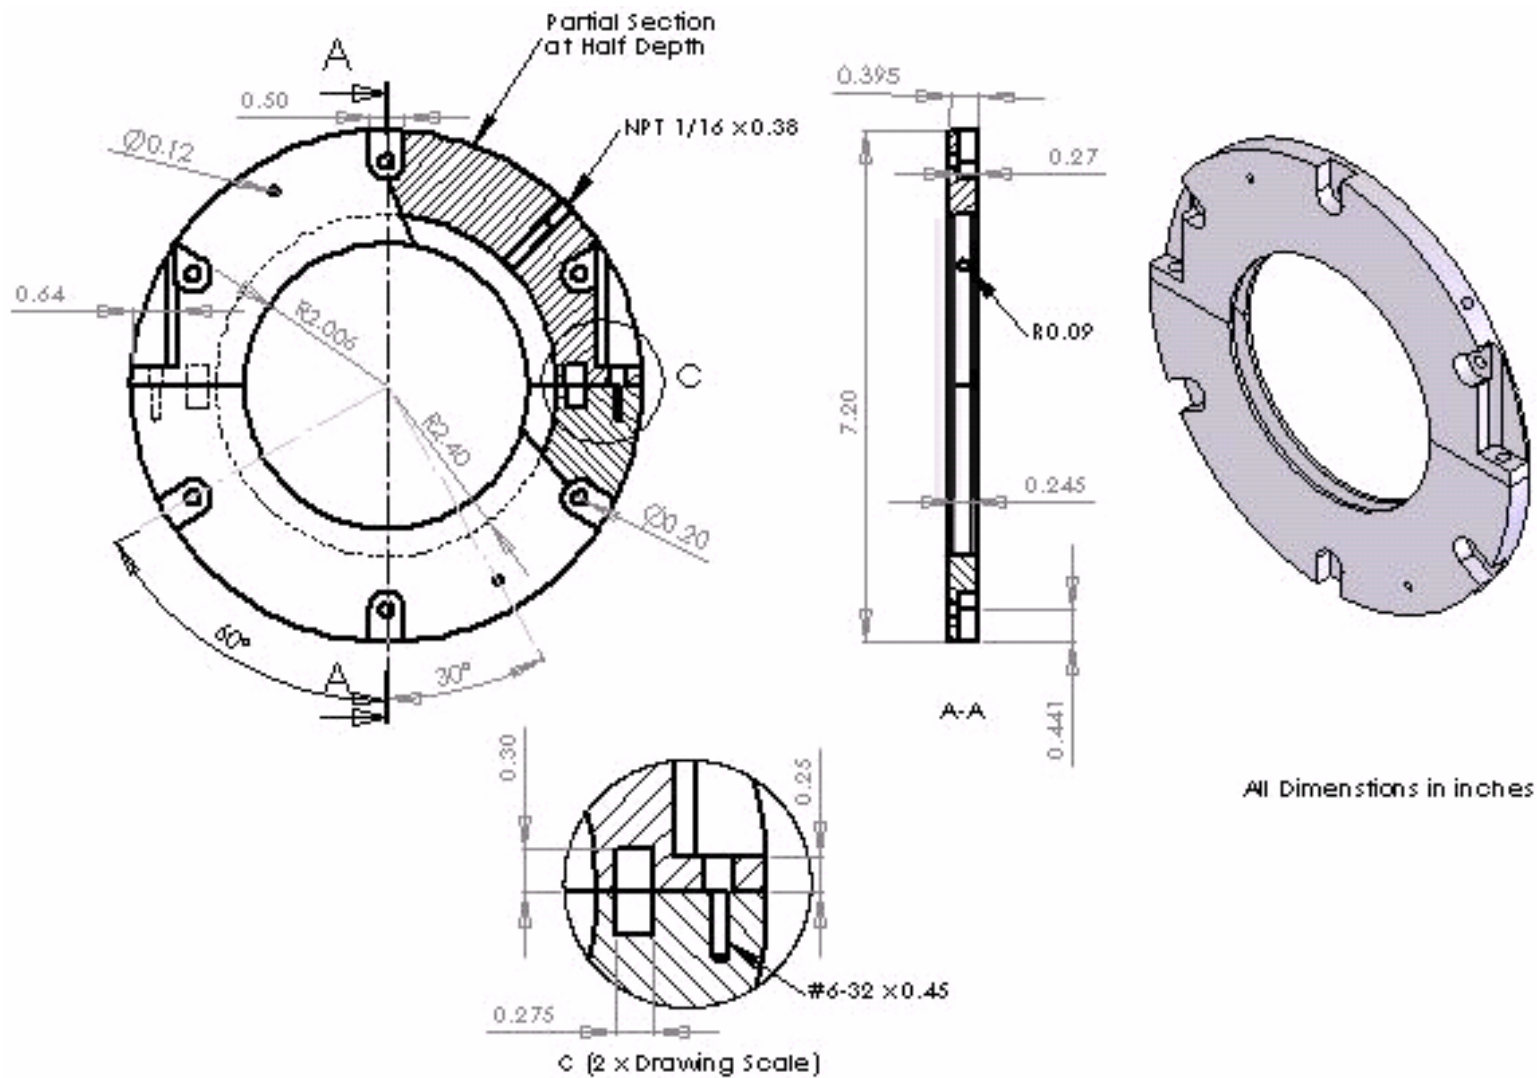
Two-bladed air-buffer seal base unit (seal set A)
